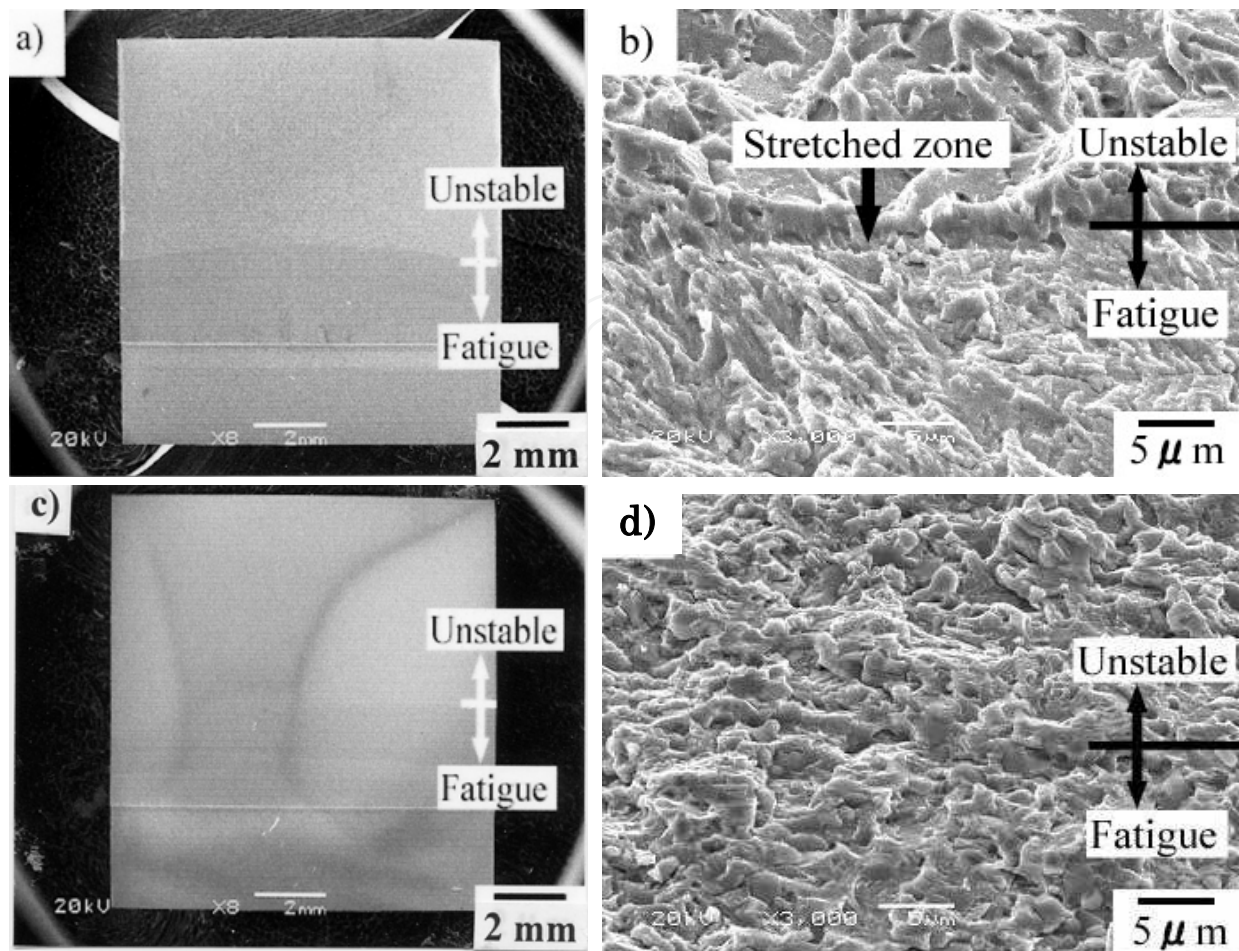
Stretched zone on three point bending fracture surface[3]. a), b) SKD61 c), d) HAP72
